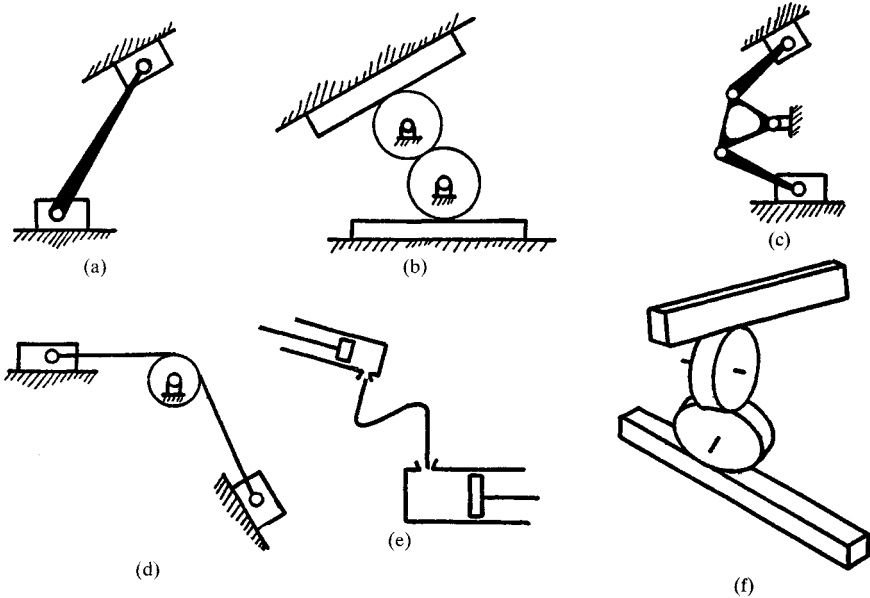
Slider connectors. These devices connect two or more reciprocating devices. (a) Elliptic trammel; (b) gears; (c) slider-crank-slider; (d) cable; (e) hydraulic; (f) helical gearing.
